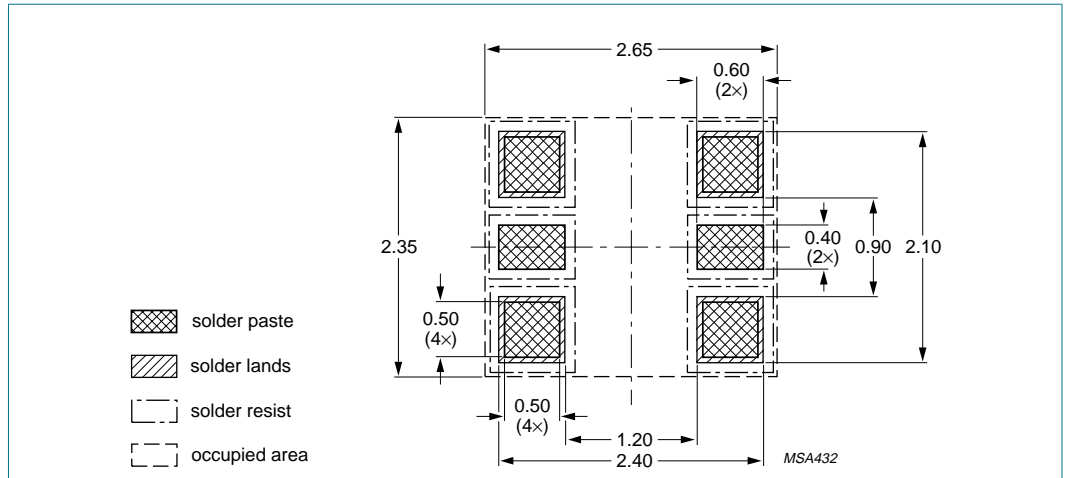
Reflow soldering footprint SOT323 (SC-70)
